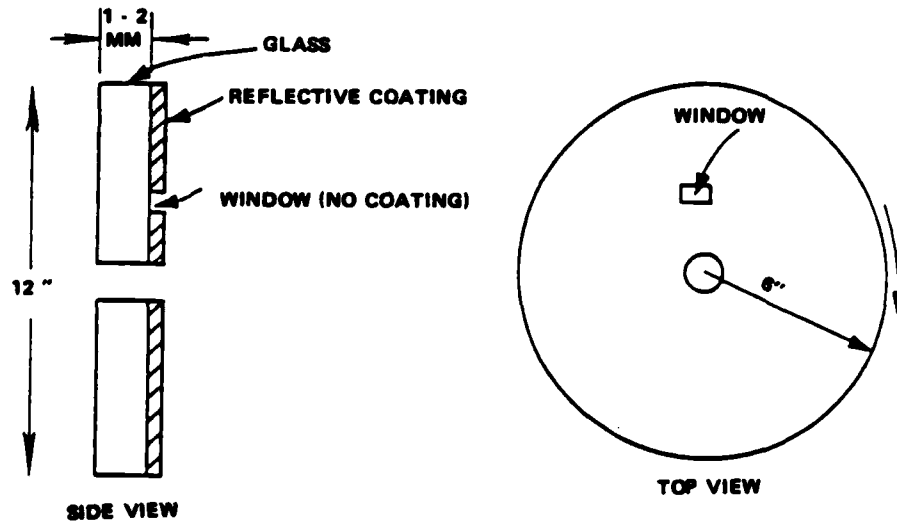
Twelve-Inch Test Fixture Showing Sample Mounting
